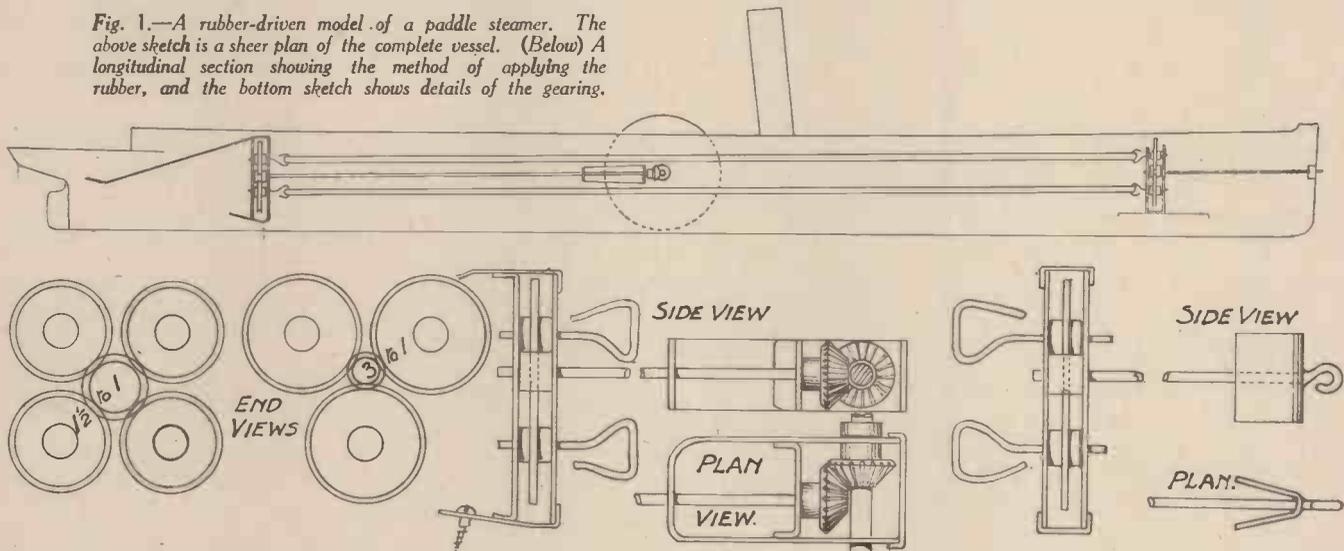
A rubber-driven model of a paddle steamer. The above sketch is a sheer plan of the complete vessel. (Below) A longitudinal section showing the method of applying the rubber, and the bottom sketch shows details of the gearing.
